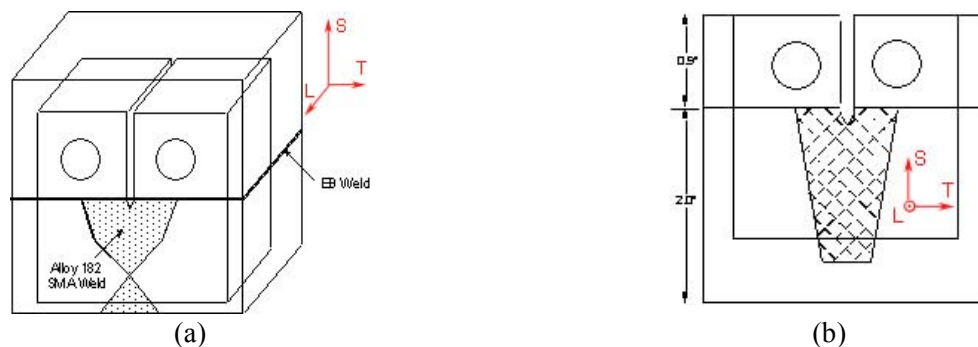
Orientation of the CT specimens from (a) the Alloy 182 SMA double-J weld and (b) the deep-groove weld.
